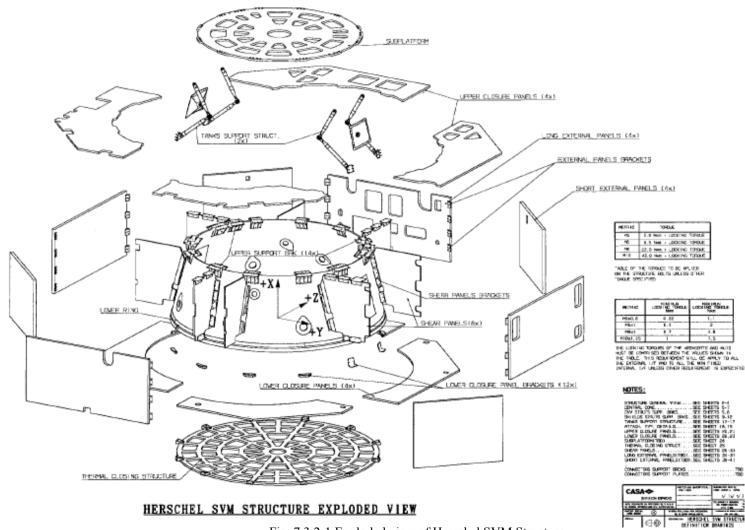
Exploded view of Herschel SVM Structure
